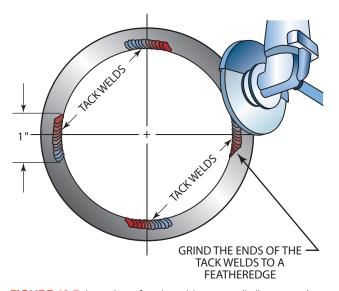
Location of tack welds on small-diameter pipe.
